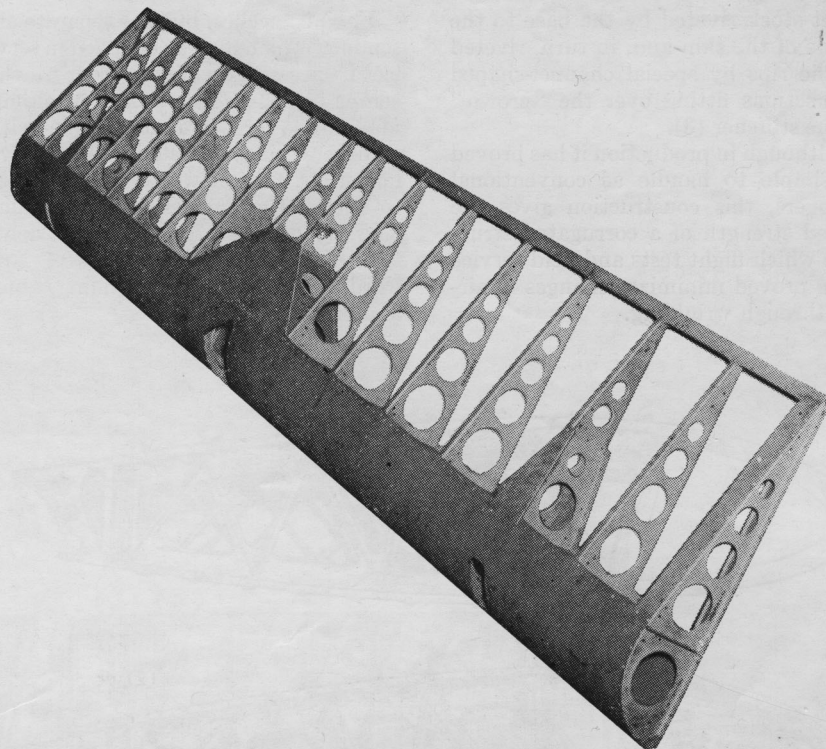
Aileron structure. The nose portion has metal skin, and the entire assembly is fabric-covered. Only the right inboard aileron has a tab.
